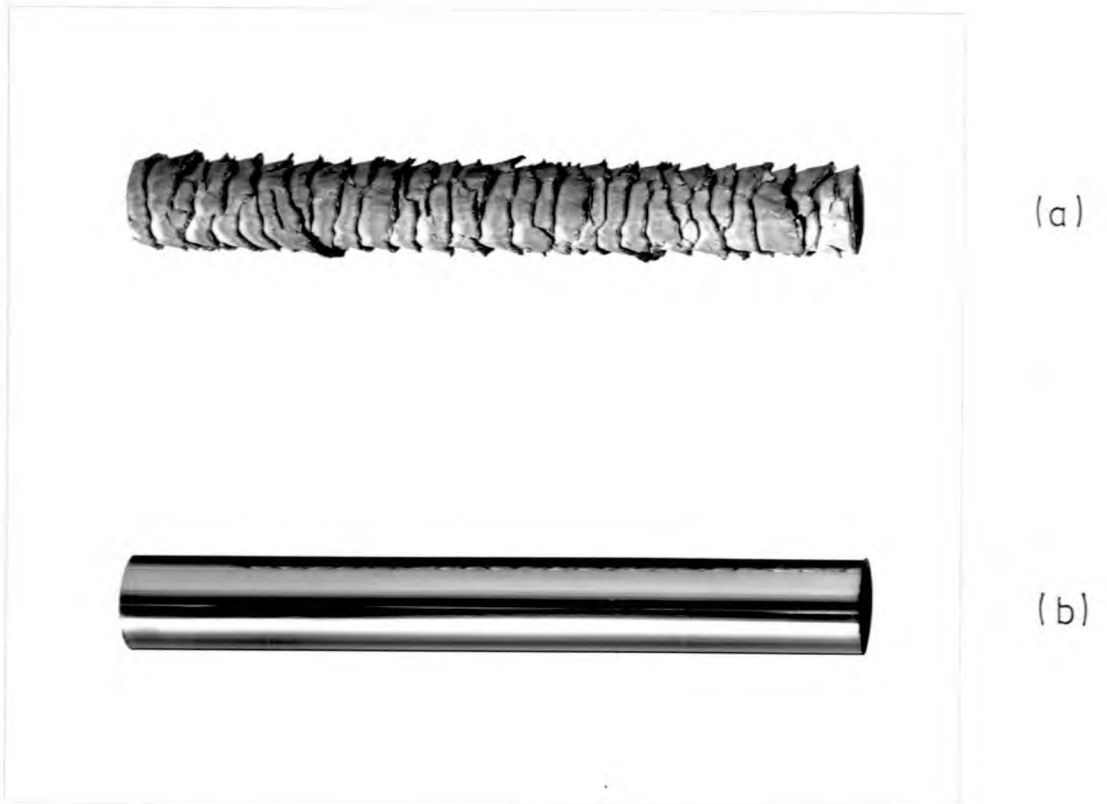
Example of the effect of inserting a small aluminium pad on the die face before extrusion. (a) Billet extruded without a pad; (b) Billet extruded with a pad.
